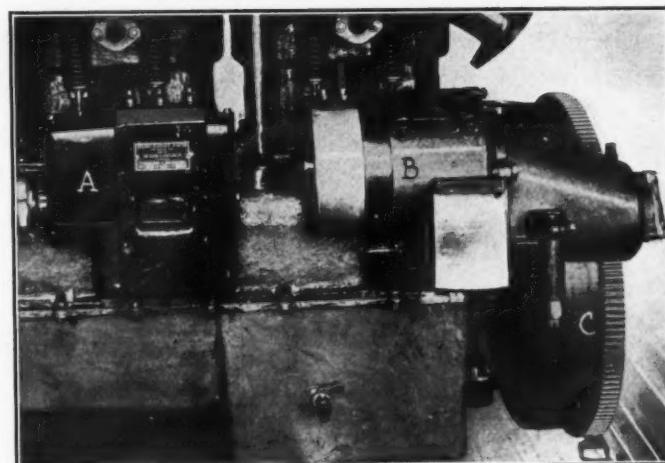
The installation of the Locomobile cranking motor B on flywheel C
